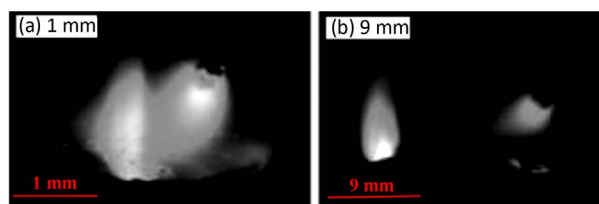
High-speed photography of laser-MIG composite welding arc morphology [58]
